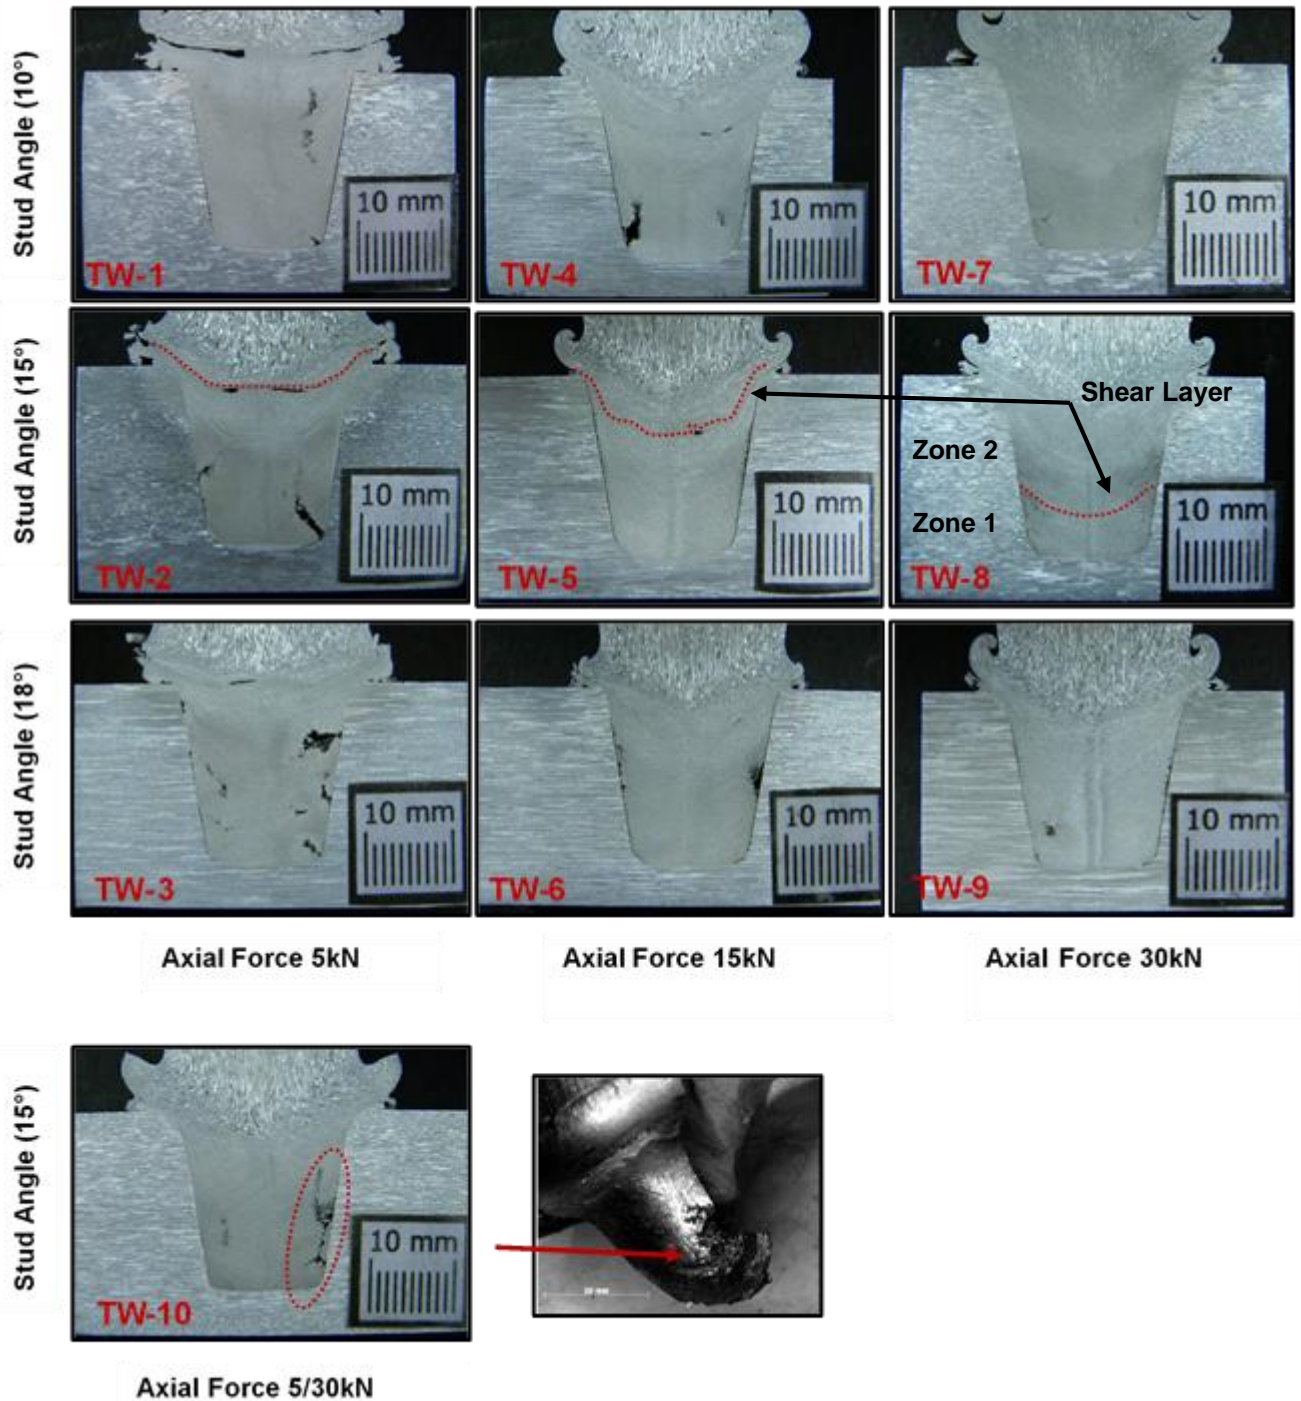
Welds TW-1 to TW-10 Macrographs
